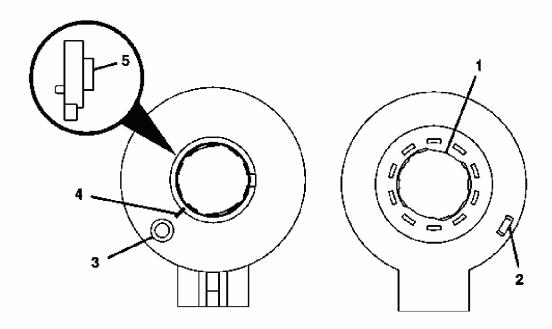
Checking Alignment Of Steering Wheel Position Sensor (Front View) Courtesy of GENERAL MOTORS CORP.
